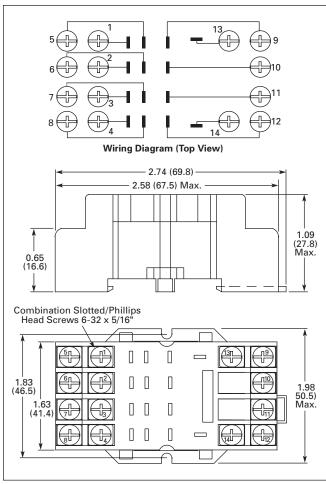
D7PA4 — Approximate Dimensions in Inches (mm)
